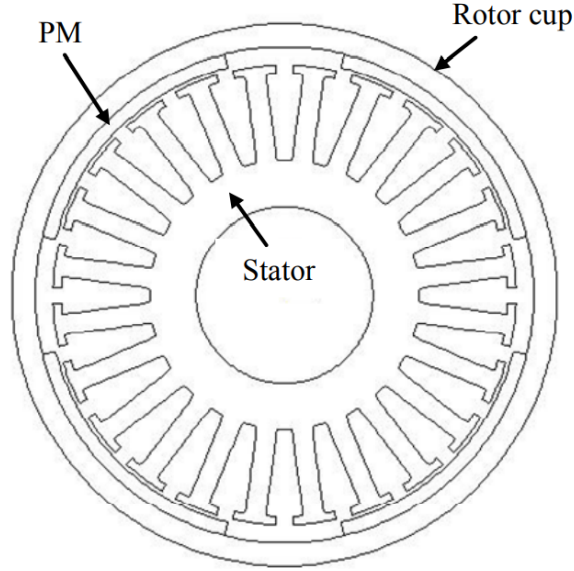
Typical cross section of the exterior-rotor surface PM motor. courtesy:[13]
